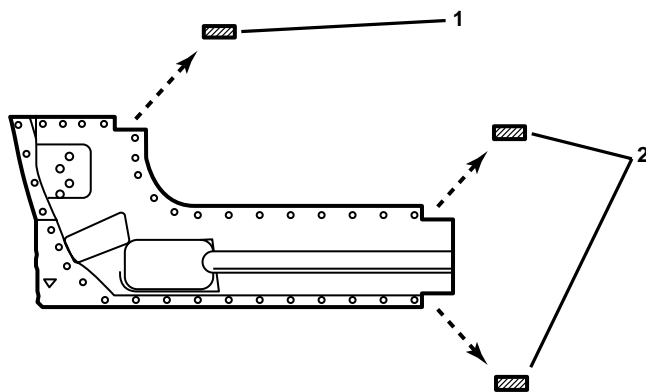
2000 DeVille Inner Front Pillar Service Part
